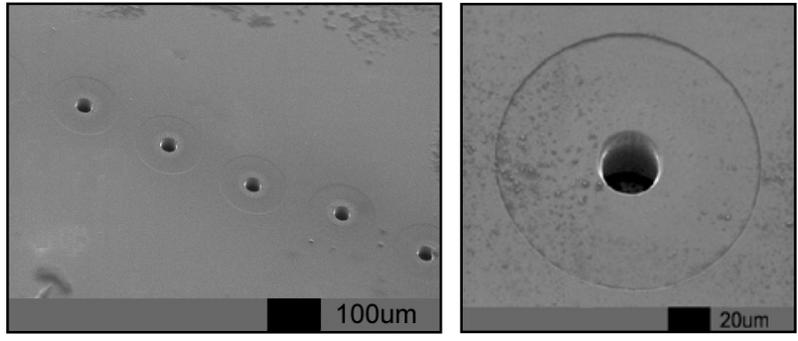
Ink-jet printer nozzles drilled using excimer laser mask projection.
